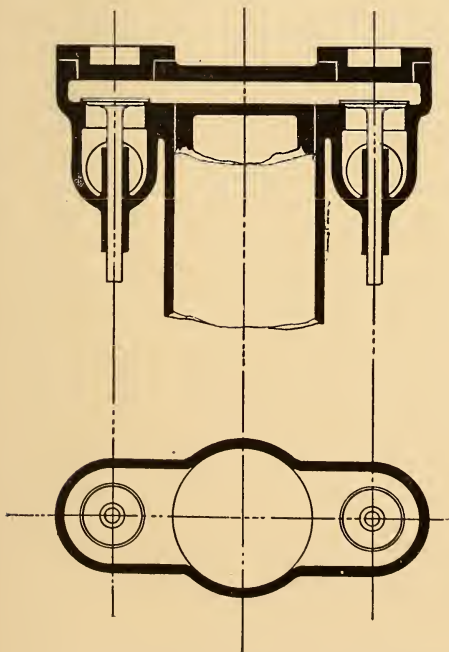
Section through cylinder having inlet and exhaust valves on opposite sides —as for instance in Albion Engine.
